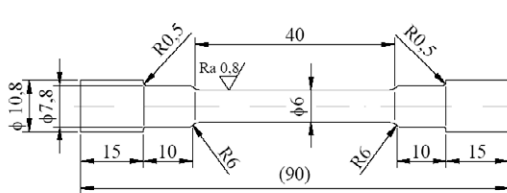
Shape and dimension of tensile test specimen (dimension in mm)
